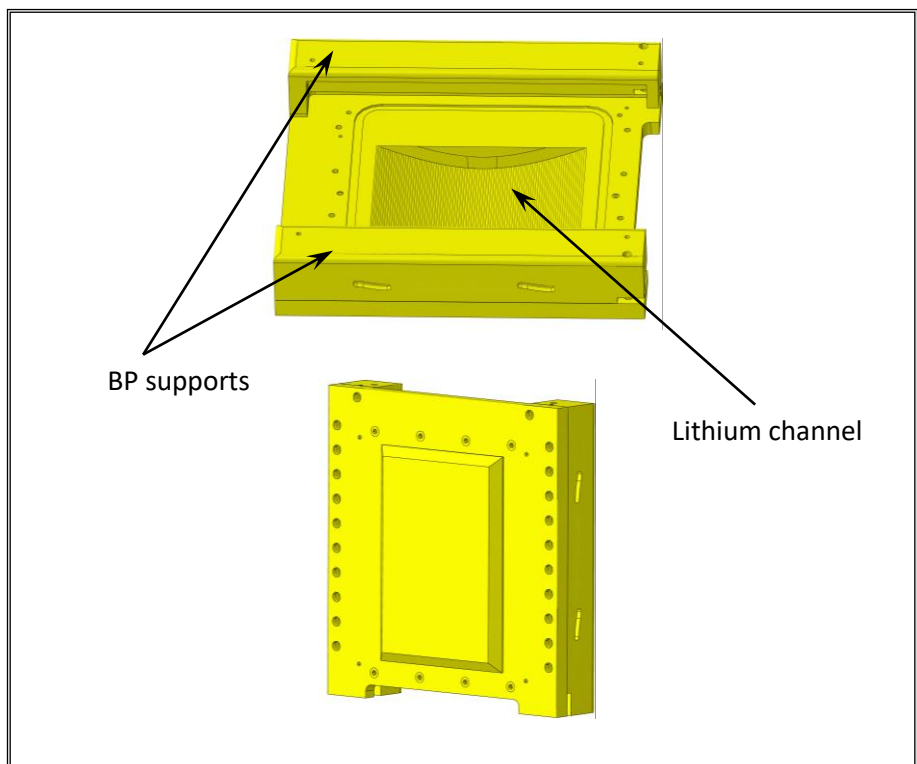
IFMIF Target Assembly back-plate (Front and back views).
